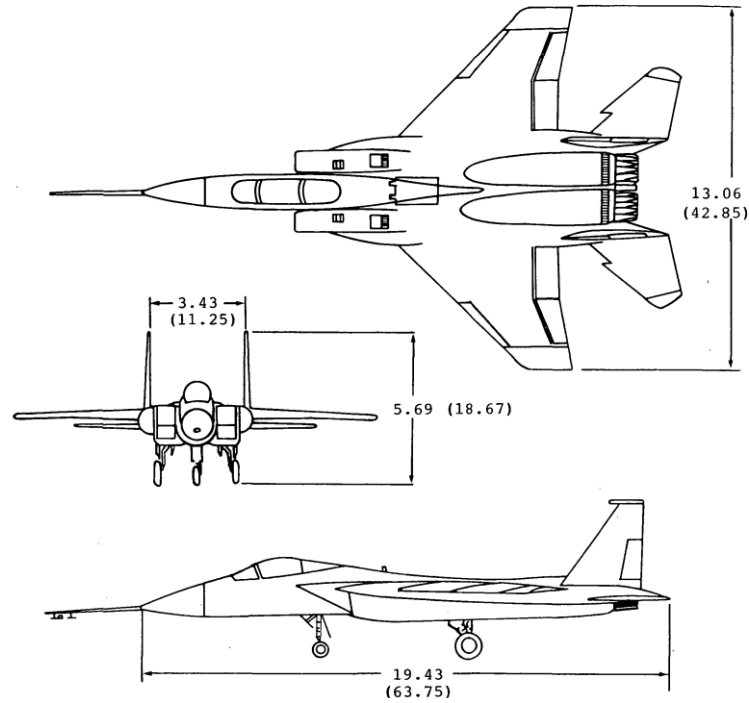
Three-View Drawing of F-15 Airplane. Dimensions in m (ft) [33]
